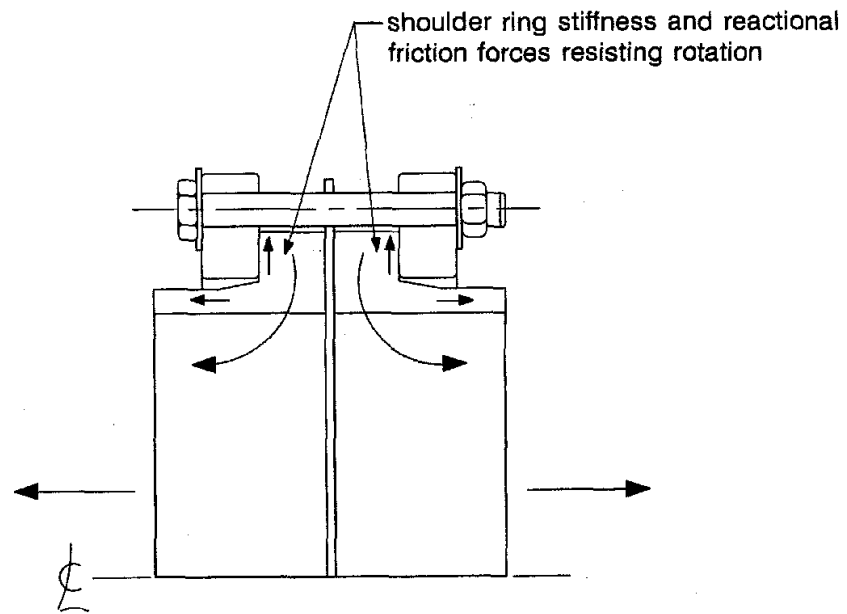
Shoulder rotation with traditional flange joint under tensile loading: 315 SDR11, PE 100, 45 tonnes (80% of pipe yield load)
